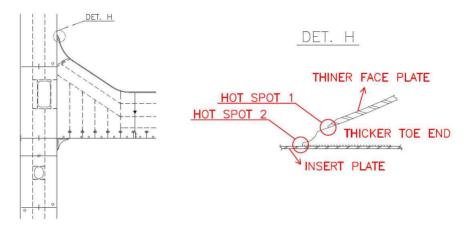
Design of Stringer Toe End for Fatigue Strength
